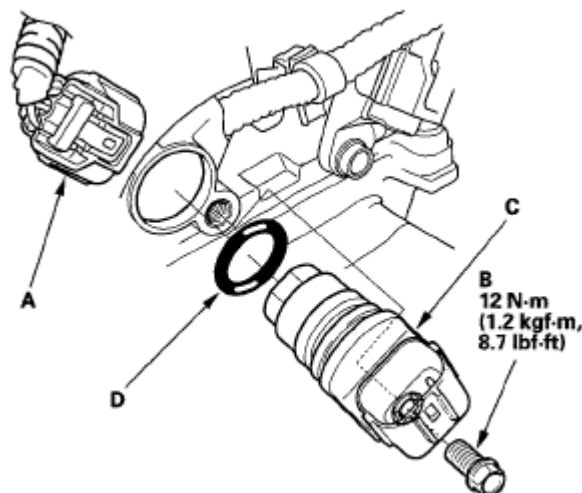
Identifying CMP Sensor A Connector With Torque Specification
